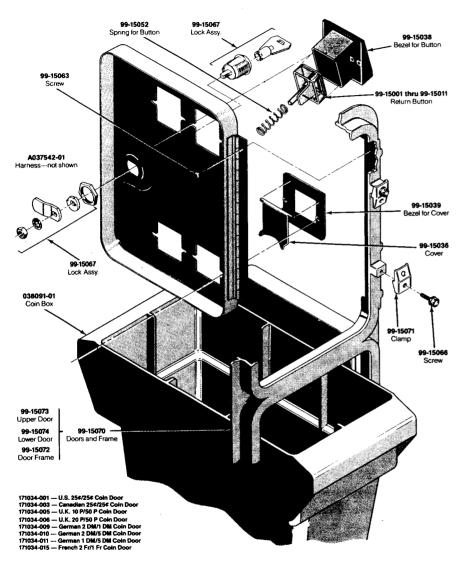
Coin Acceptor Coin Door Assembly, continued 171034-xxx A
